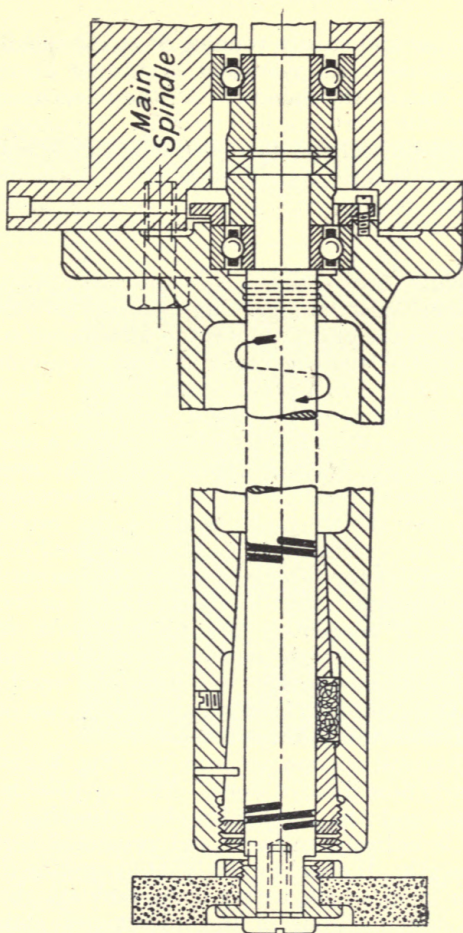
DETACHABLE SPINDLE FOR CHURCHILL PLANETARY TYPE
